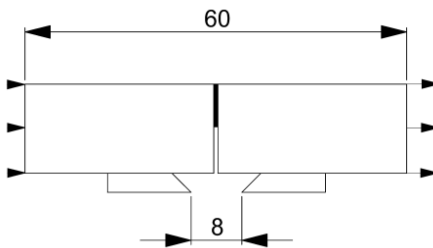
SENT specimen under tensile loading (dimensions in mm)
